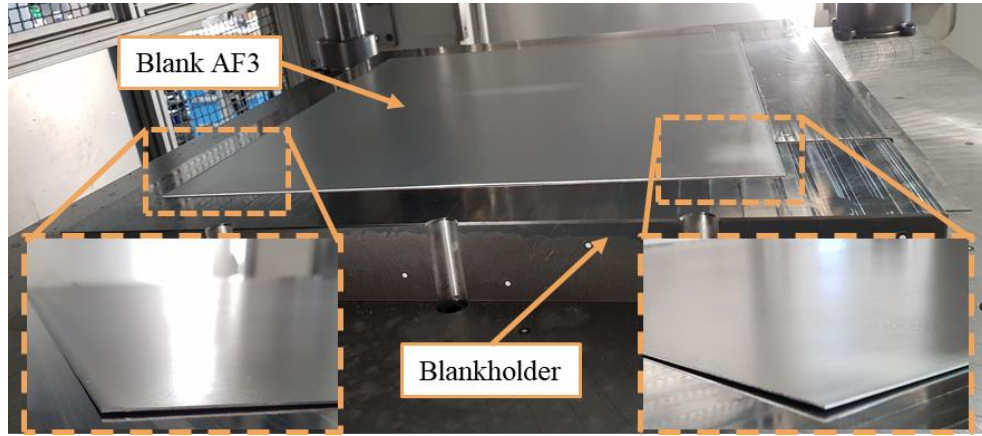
The form of convex curved AF3 blank after positioning at the blankholder
